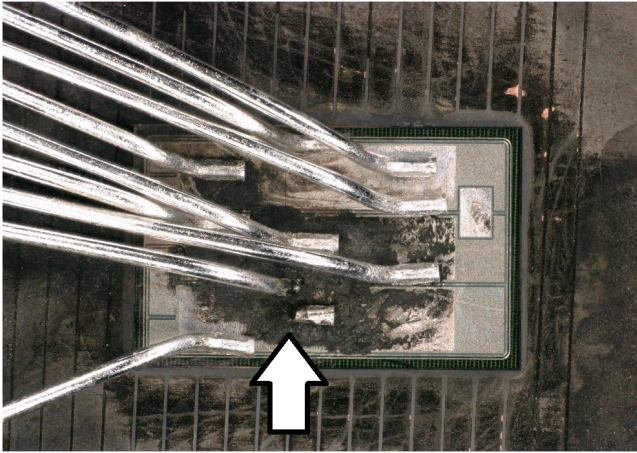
Top view of DUT #6J after chemical decapsulation process. Cracked bond wire is marked with white arrow
